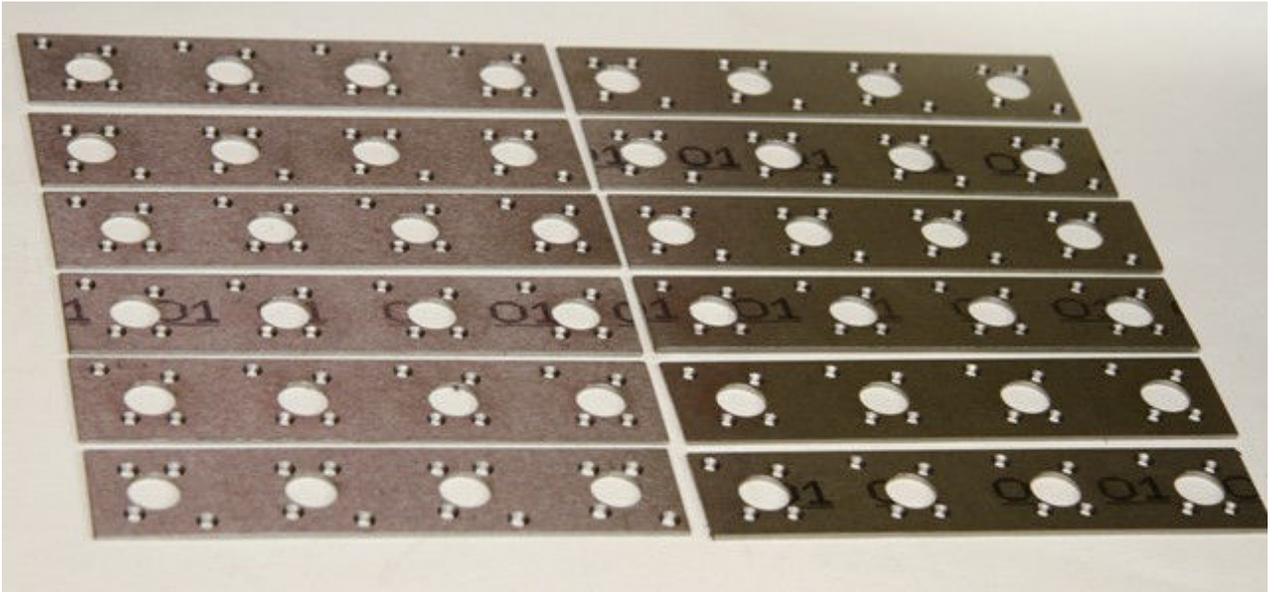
shows the finished toggle clamp blanks for the intake manifold. Each blank starts out 1/4” square stock, the holes are drilled and then the external profile is machined. Once all the blanks are finished each blank is then inverted and clamped in a vise – then all the extra metal is removed, which results in a finished item that can be seen in picture #7.
